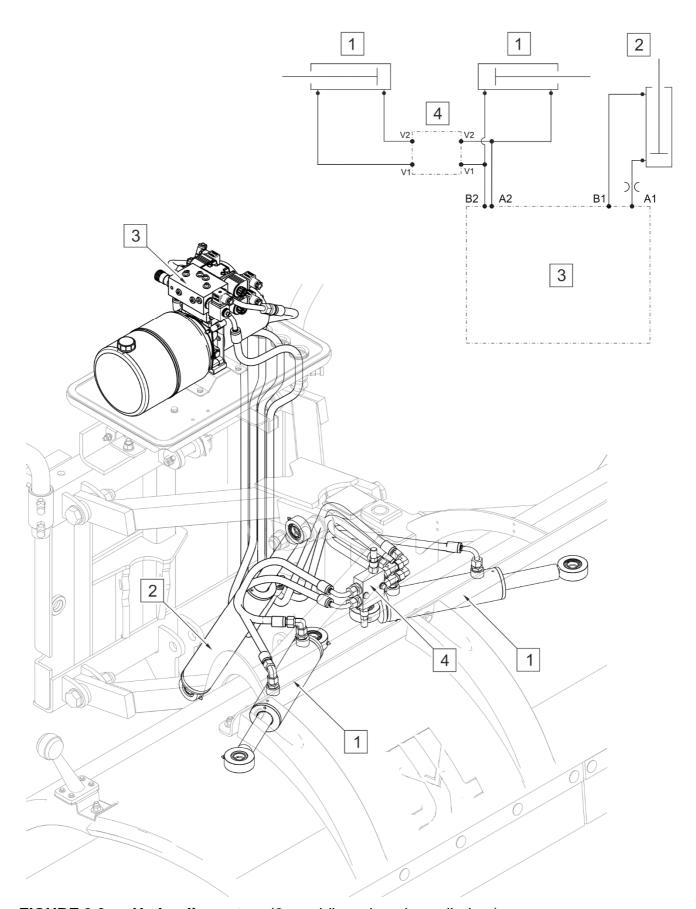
Hydraulic system (2 mouldboard turning cylinders) (1) - mouldboard turning cylinder; (2) - mouldboard lifting cylinder; (3) - Power-Pack electrohydraulic power supply; (4) - overflow valve
